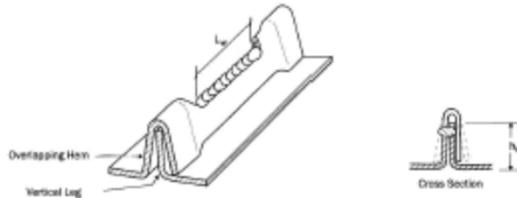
Top Seam Weld - Vertical Leg and Overlapping Hem Joint
